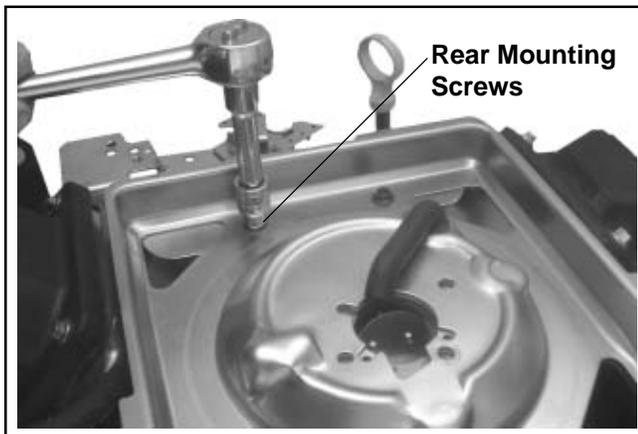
Rear Mounting Screws (Used with Plastic Intake Manifold).
